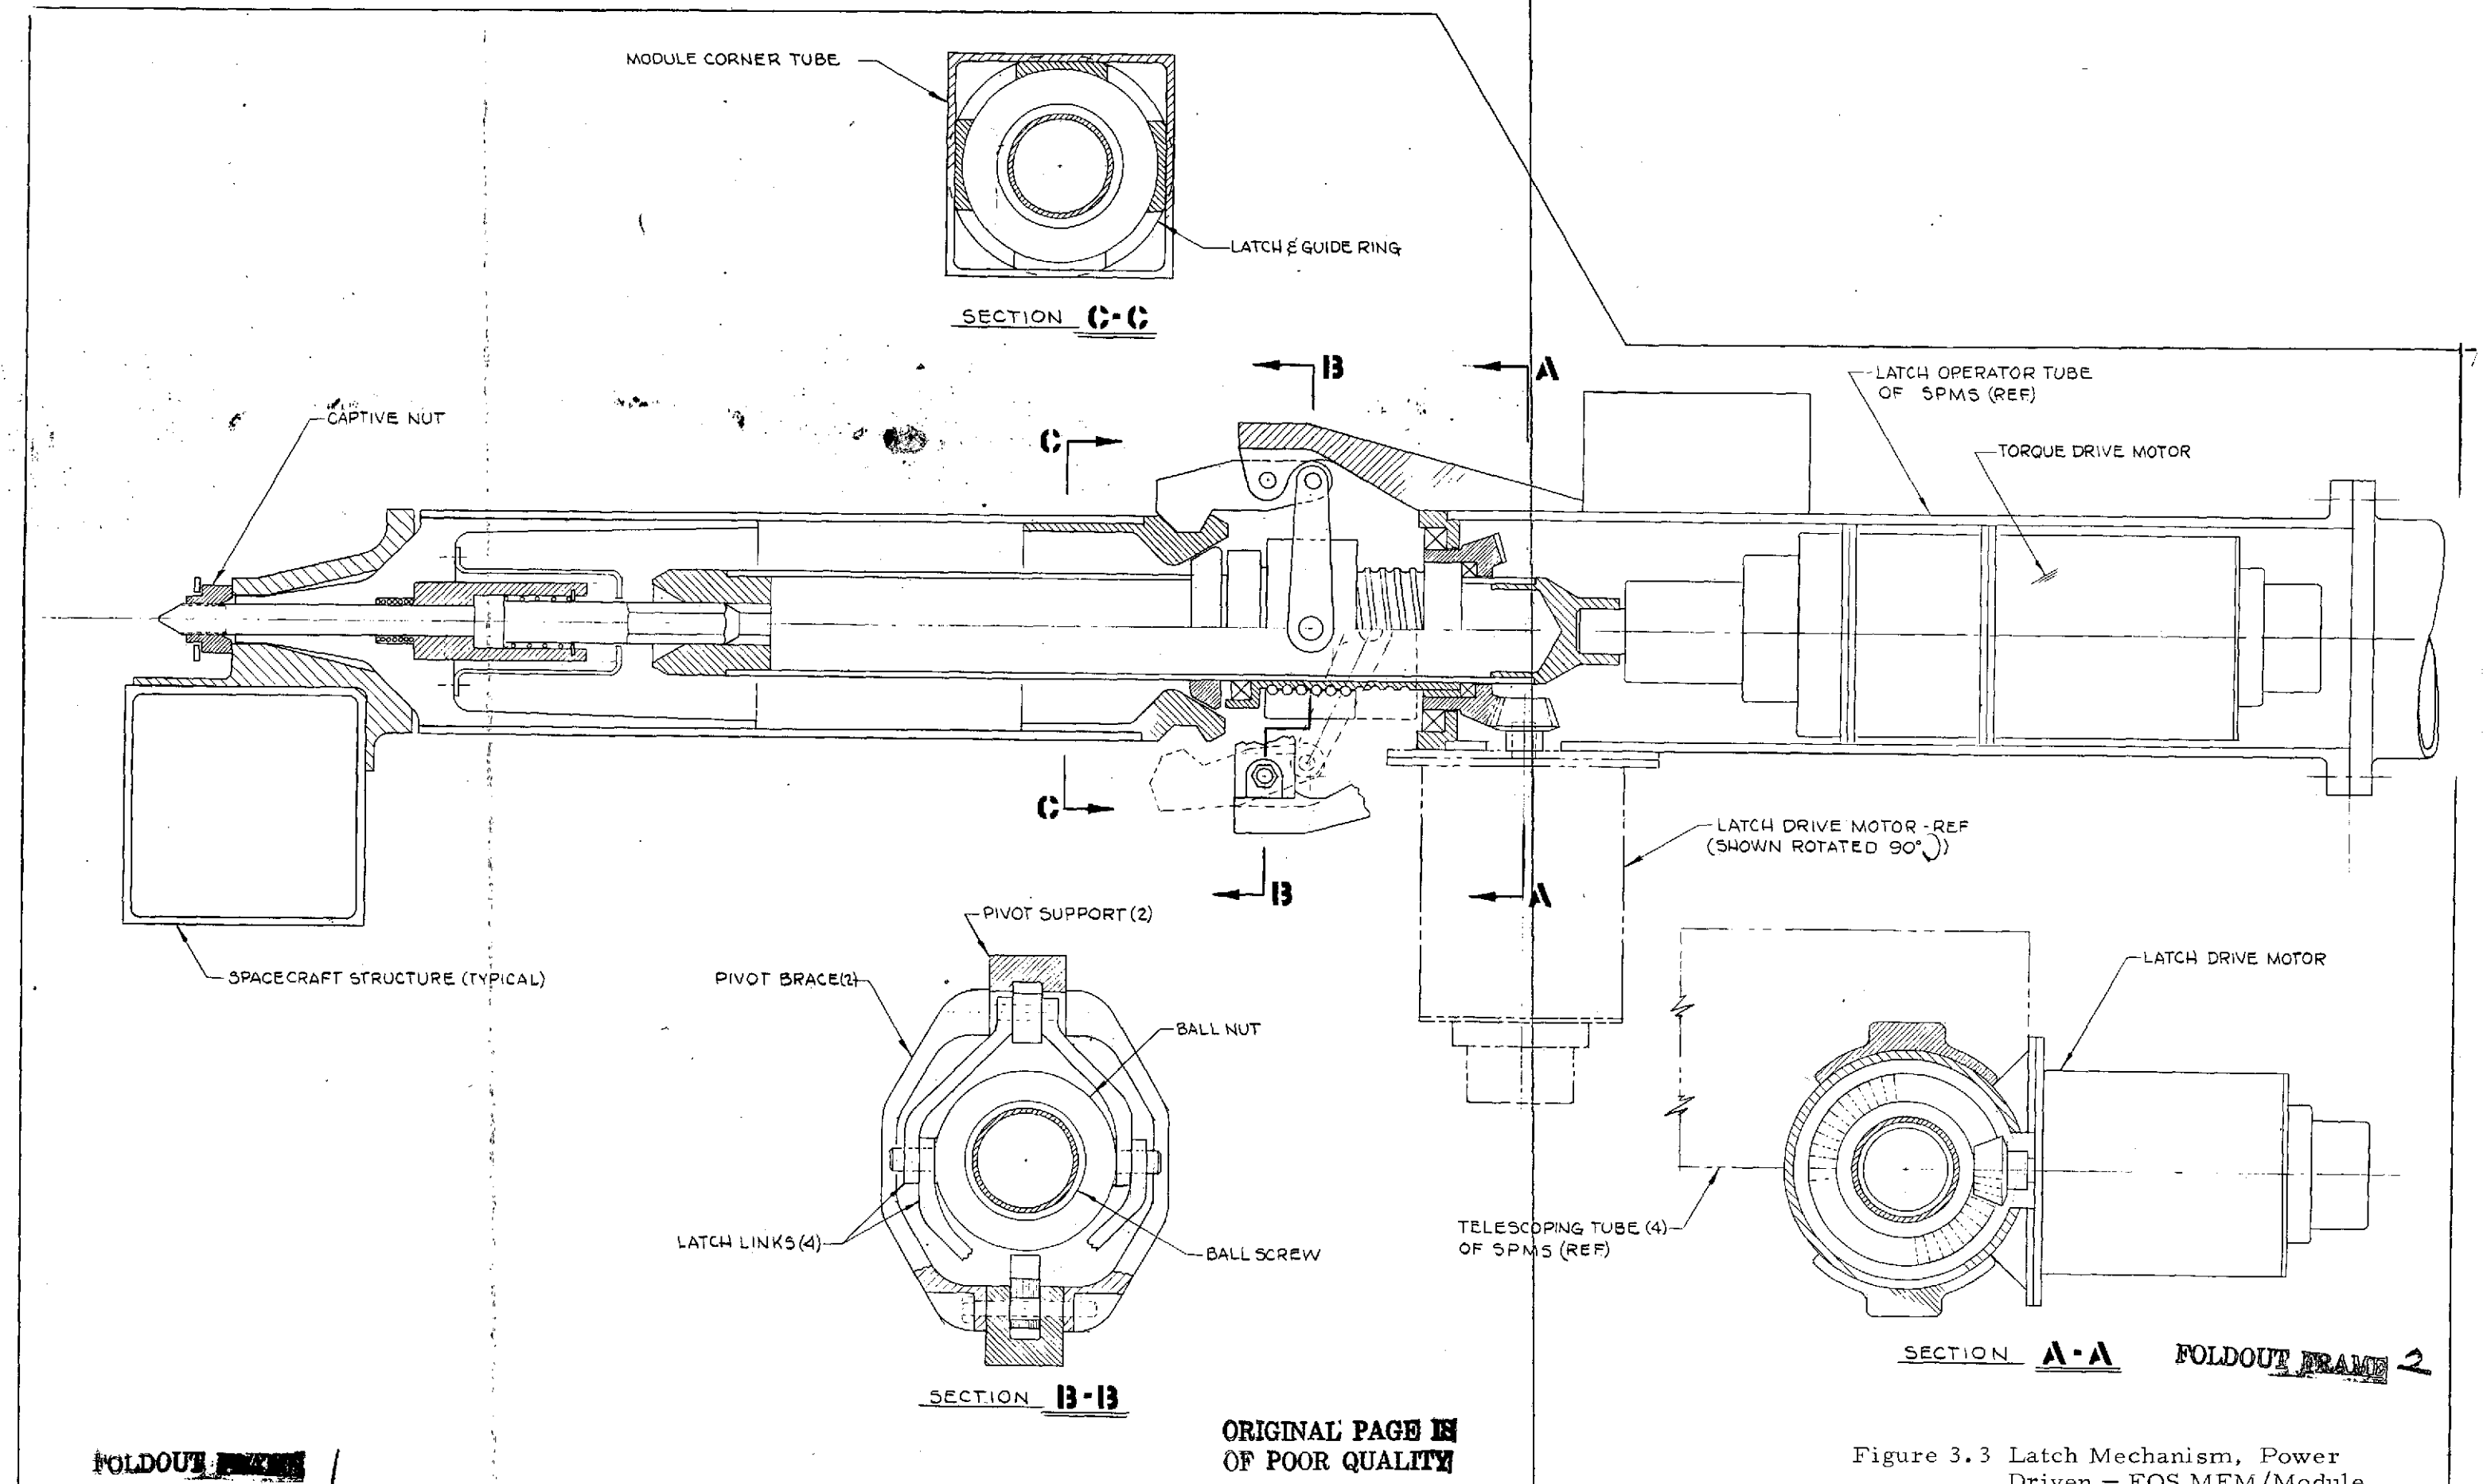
Latch Mechanism, Power Driven - EOS MEM/Module Interface
